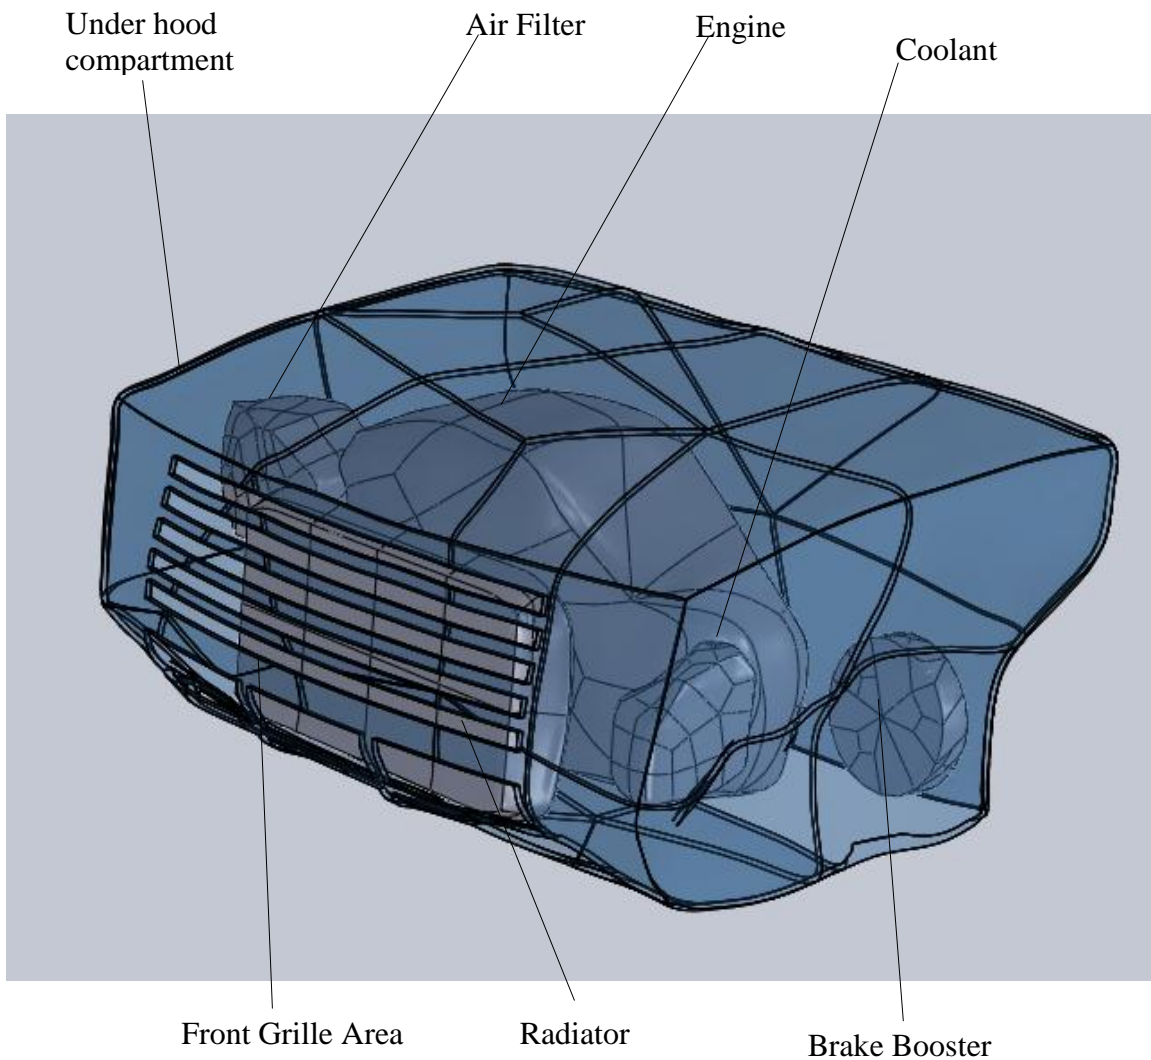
Perspective view of a 3-Dimensional CAD model of the car under hood, used for CFD simulations.
